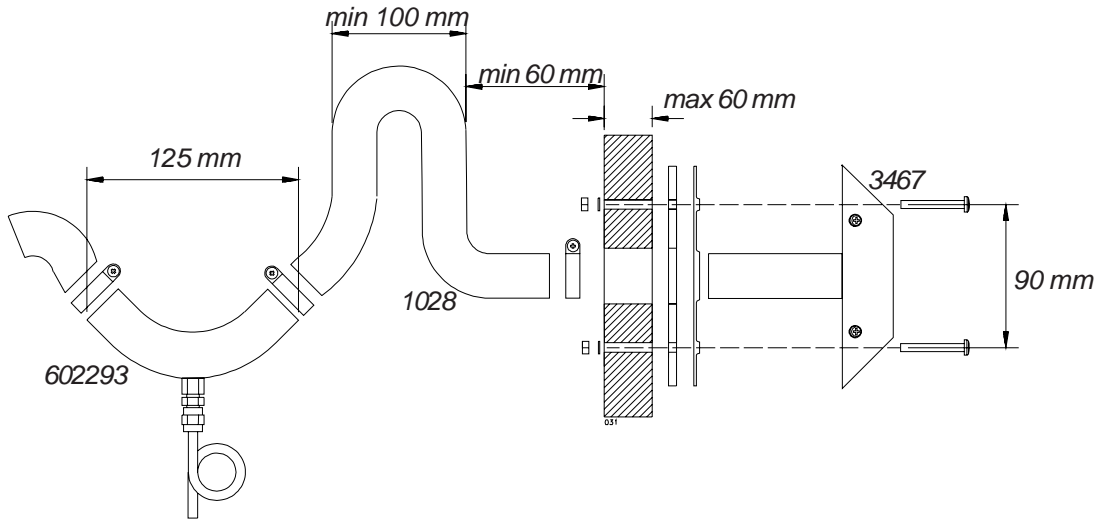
Installation of exhaust lead-though 1066 in hull. The installation opening is  $\varnothing$  35 mm and the screw holes are 4 x  $\varnothing$  5 mm.
